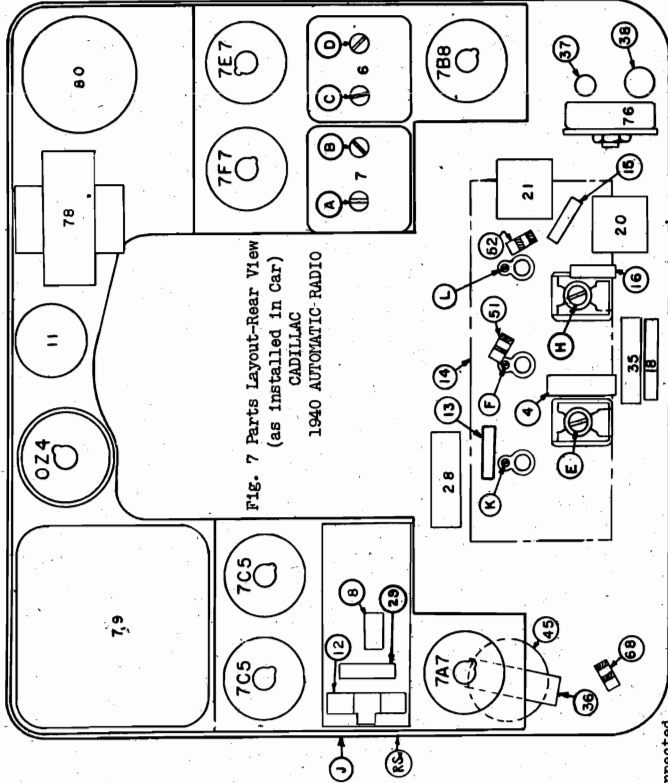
Parts Layout-Rear View (as Installed in Car) CADILLAC 1940 AUTOMATIC RADIO
